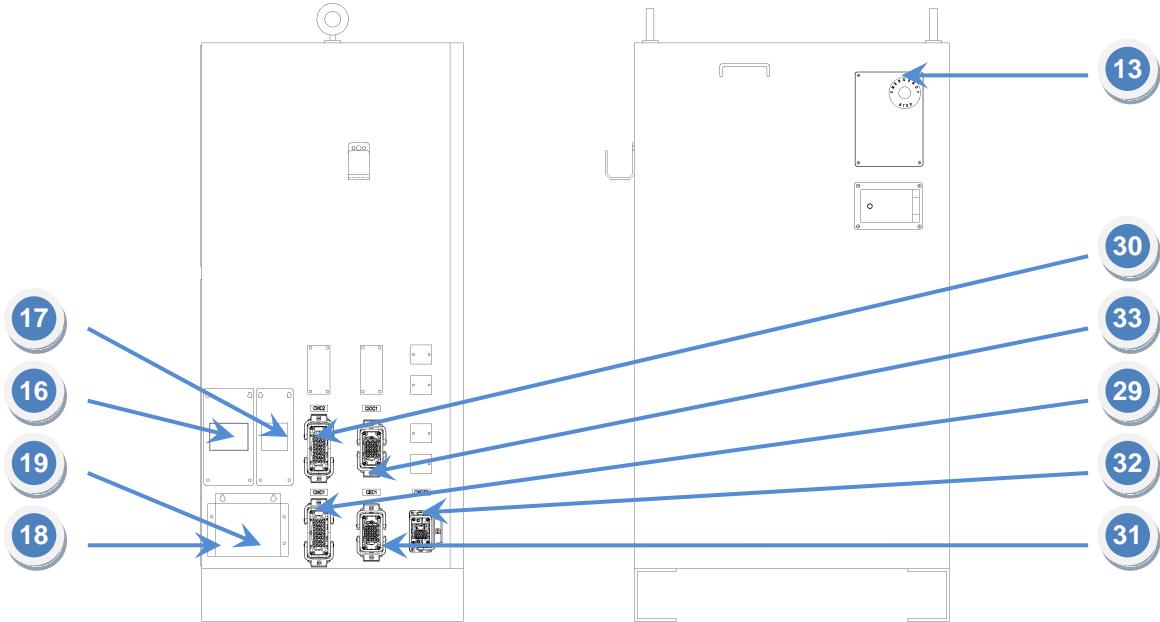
Hi5-C10 Part arrangement parts in the exterior of the controller
